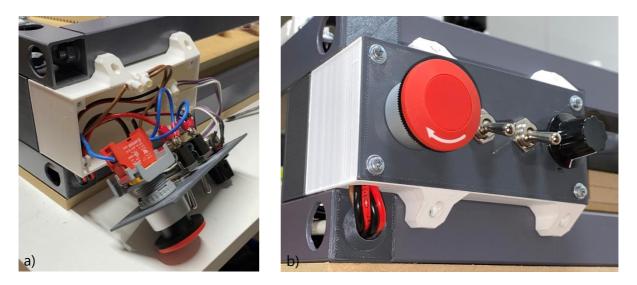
Prototype, a) control box wiring; b) control box cable routing.
